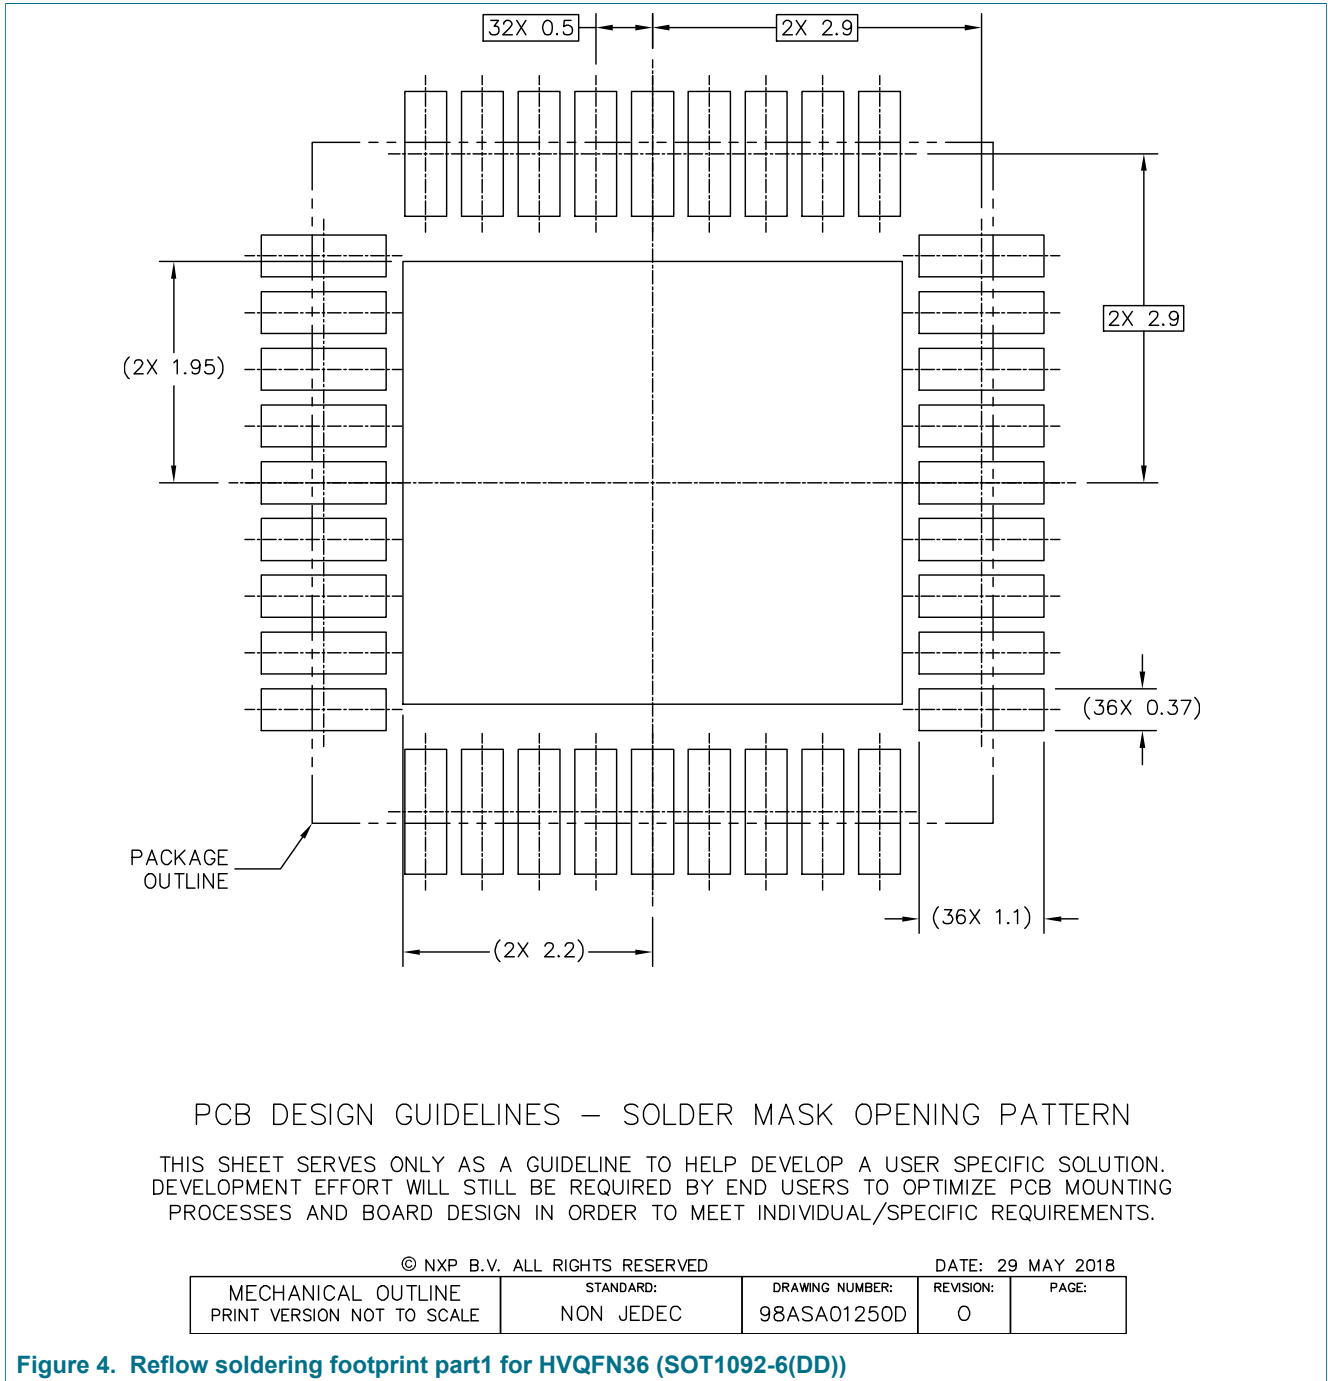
Reflow soldering footprint part1 for HVQFN36 (SOT1092-6(DD))
